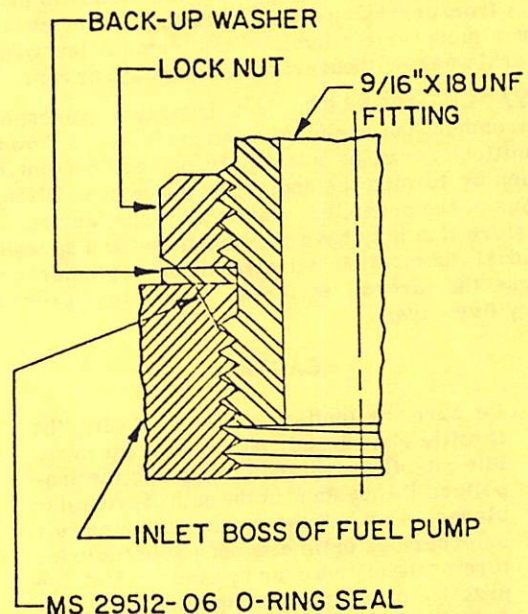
Section Thru Inlet Boss Showing Locknut Tightened Against Back-Up Washer
